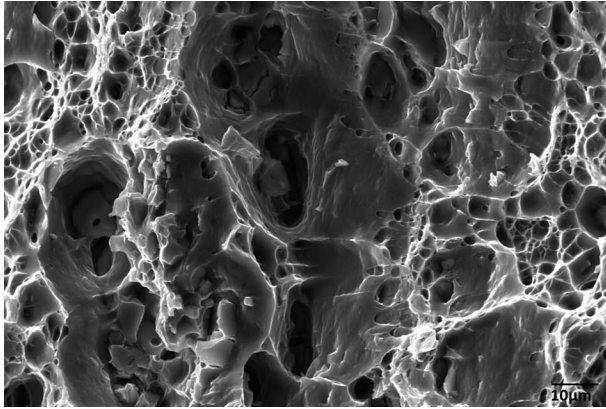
Higher magnified fractograph shown in Fig. 81 indicating ductile fracture represented by dimples
